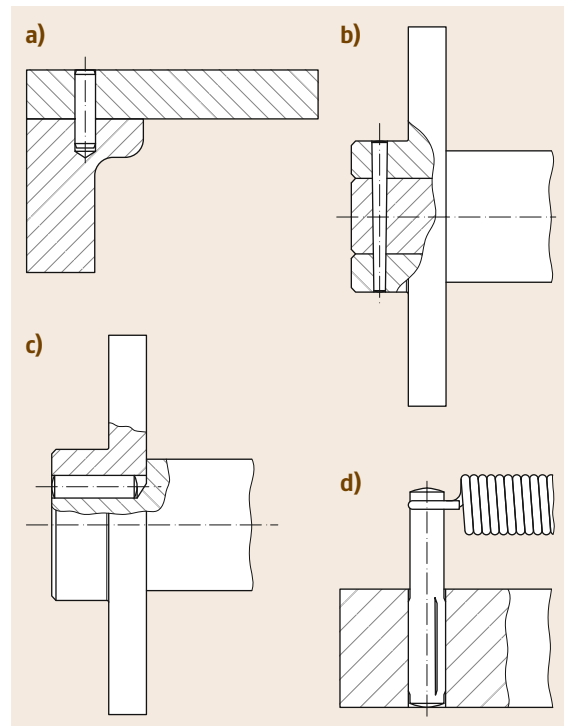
d Pinned joints (examples): (a) position fixing using parallel pins, (b) transverse pin jointing using tapered pin, (c) longitudinal pin with cylindrical grooved pin, and (d) cylindrical grooved pins (with neck) as pins
